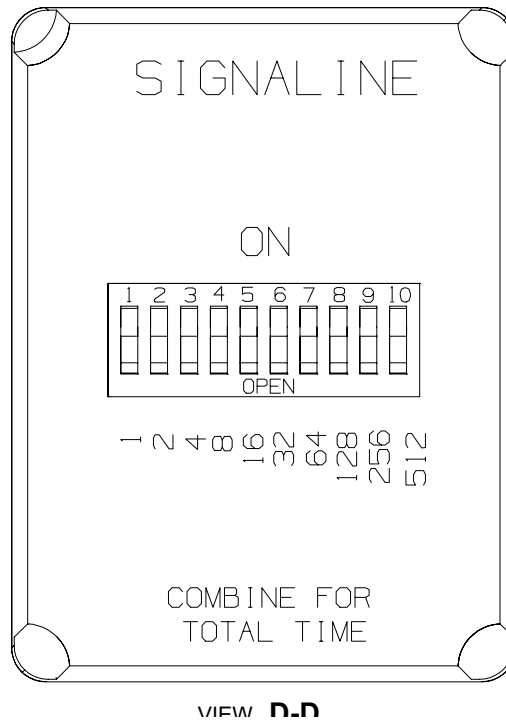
Pan Assembly Replacement (Sheet 5 of 6)
